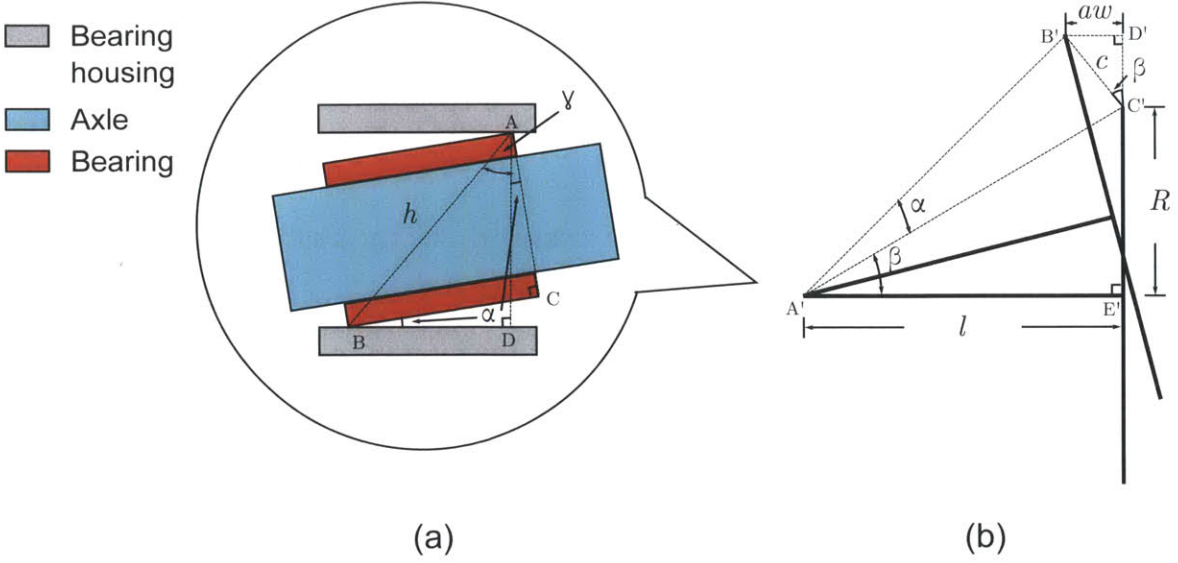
(a) zoomed-in view and the geometry of the bearing fitting and (b) the resulting geometry of the axle/rotor misalignment. The two large bold T's in the schematic represent the two axle/rotor positions shown in Figure 4-3.
